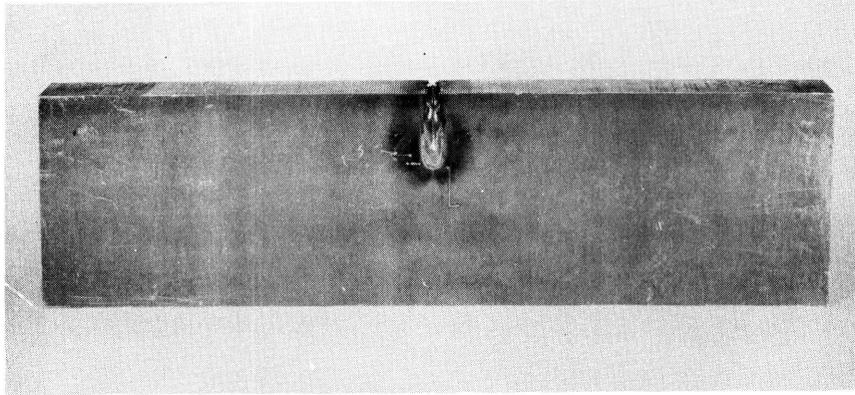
Aluminum alloy drop-weight tear specimen with electron beam crack starter weld
